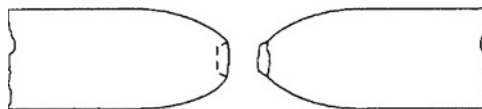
'Cup-and-cone' failure of a mild steel test piece.
